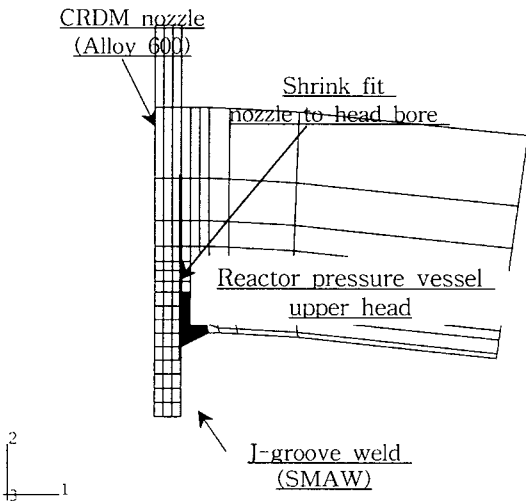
An axi-symmetric finite element model used for the centre CRDM nozzle and head penetration weld
